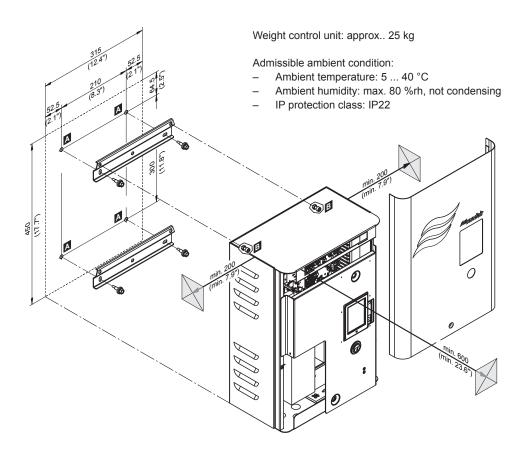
Mounting the control unit - dimensions in mm (Inch)
